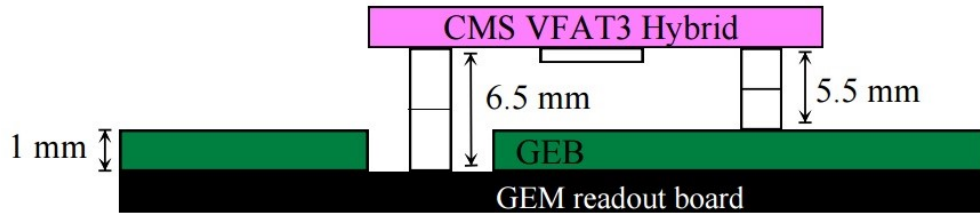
VFAT3 ASIC connection between GEM readout board and GEM electronics board
